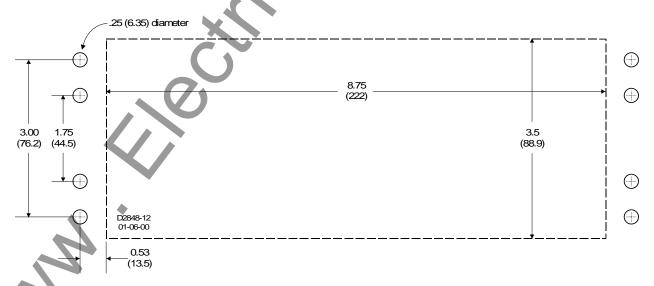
H1 Case, Single Relay Mounting Dimensions for Panel Mounting without an Escutcheon Plate
